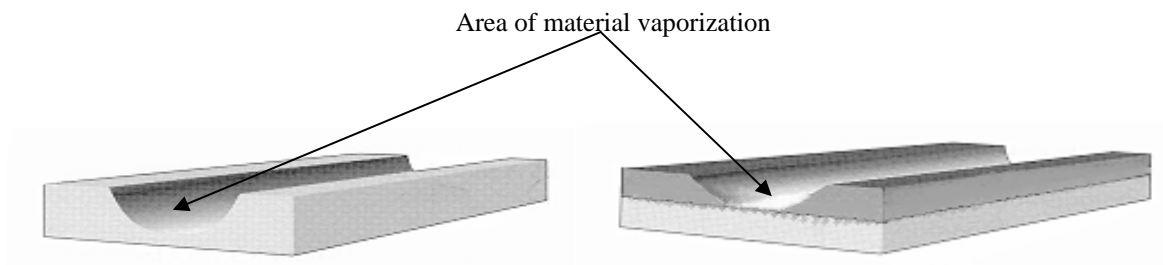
Laser Engraving Applied Directly to a Surface (left) and to a Surface Coating (right)
